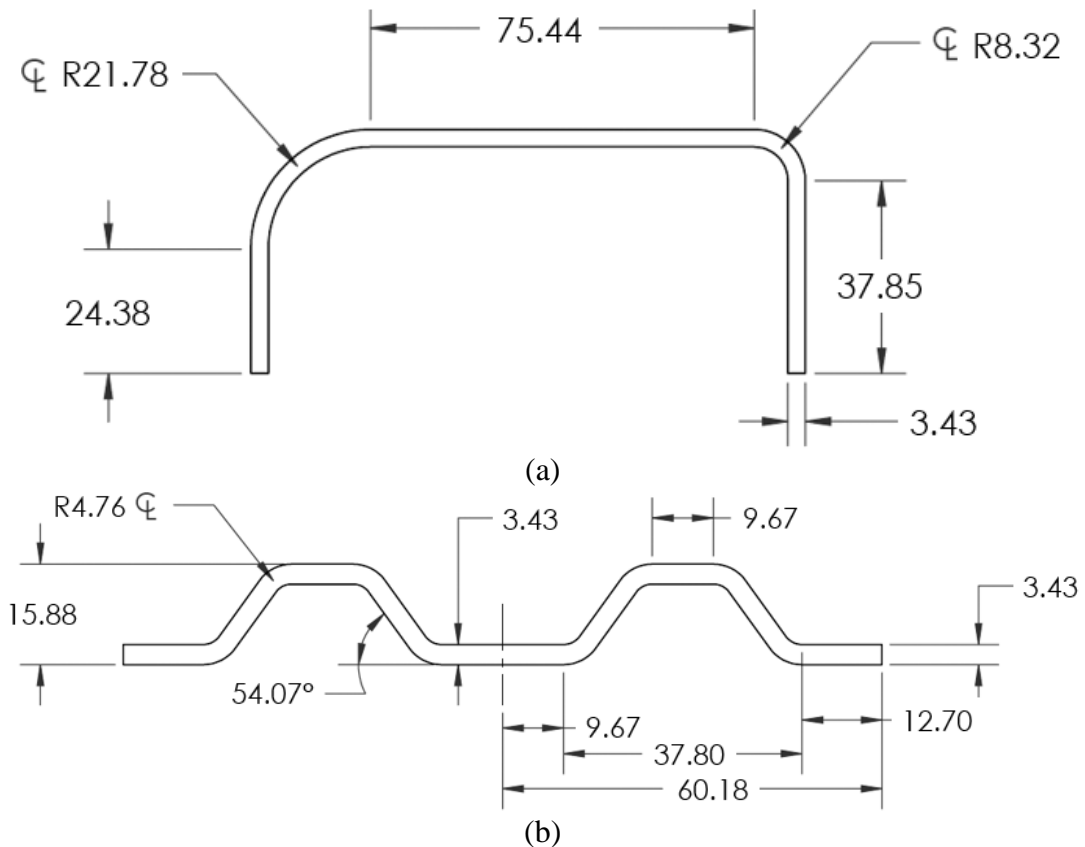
Specimen cross sections for the (a) C-channel and (b) corrugated geometries. Dimensions in mm.
